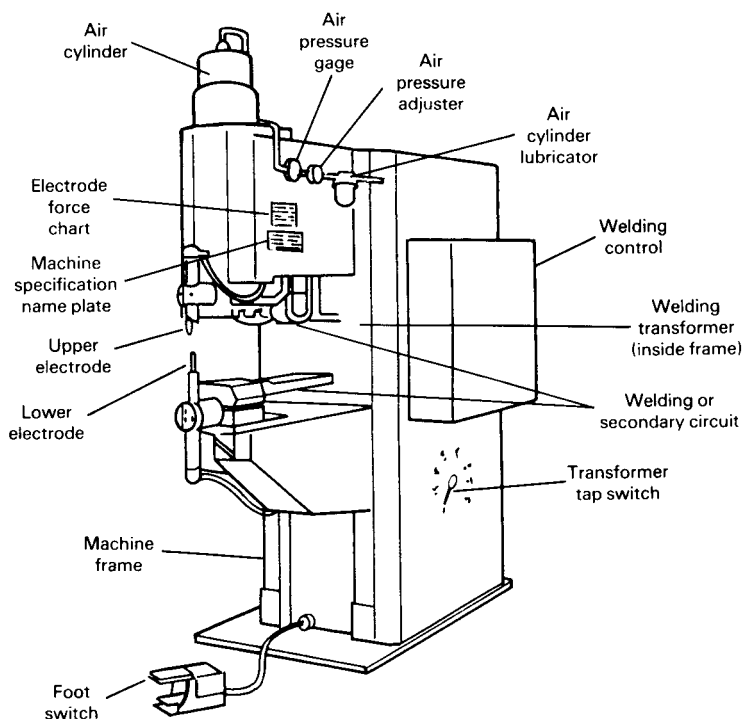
Schematic showing primary components of a resistance welding machine
